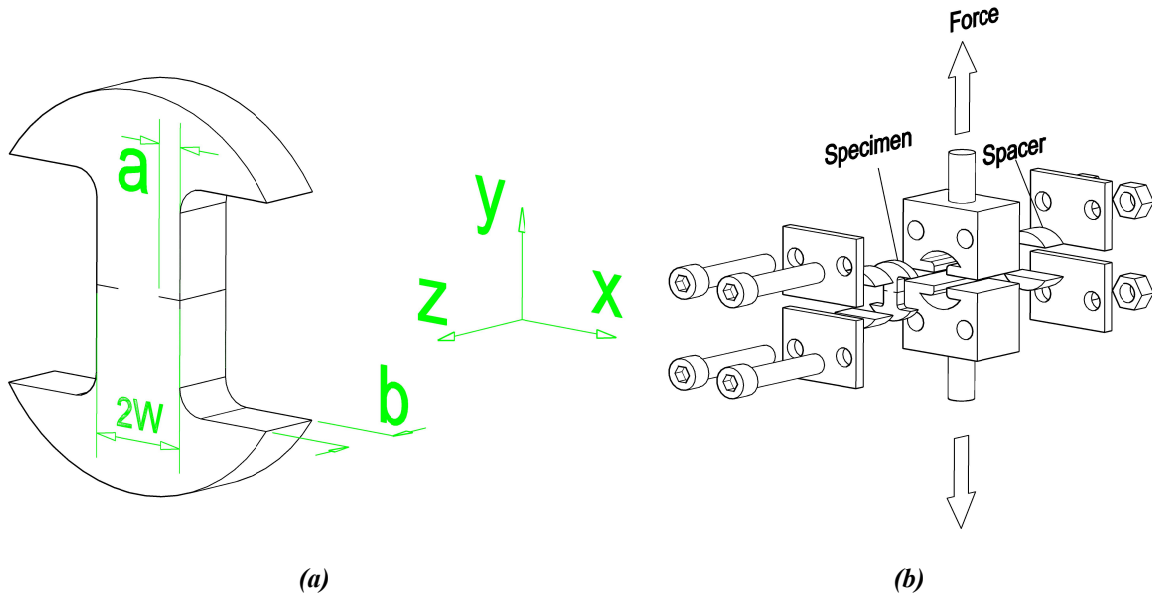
Test specimen (a) the fixture connecting the sample to the loading frame (b) single edge notch tension specimen
